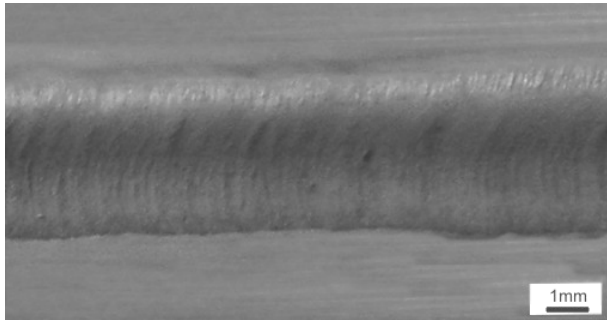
View of the MCMgAl13Zn1 casting magnesium alloy face of weld after laser treatment with WC, scan rate: 0.75 m/min, laser power: 1.2 kW
